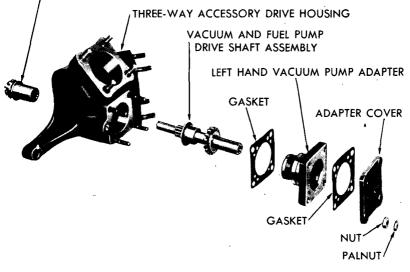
A-C Fuel Pump and Adapter Assembly Disassembled THREE-WAY ACCESSORY DRIVE GEAR
